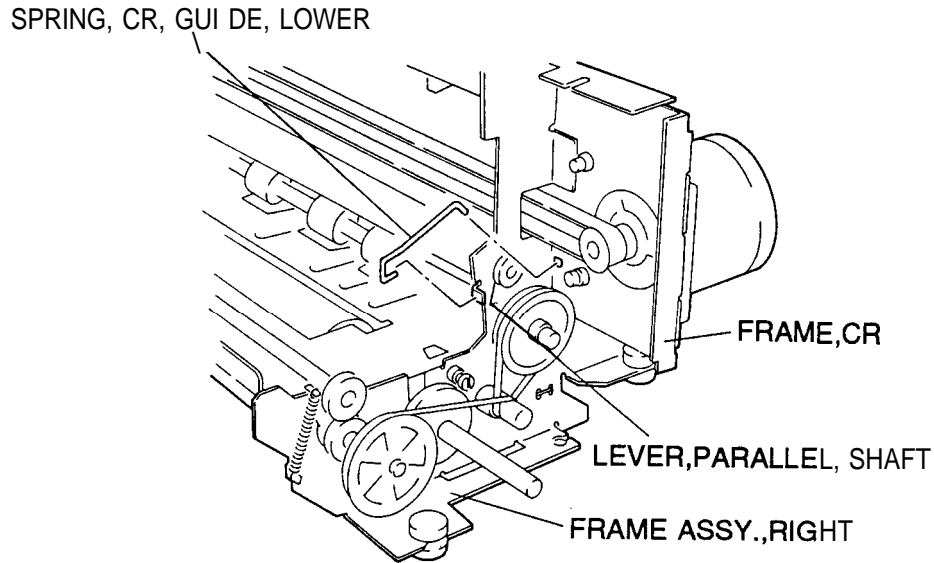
Removing the SPRING,CR,GUIDE, LOWER
